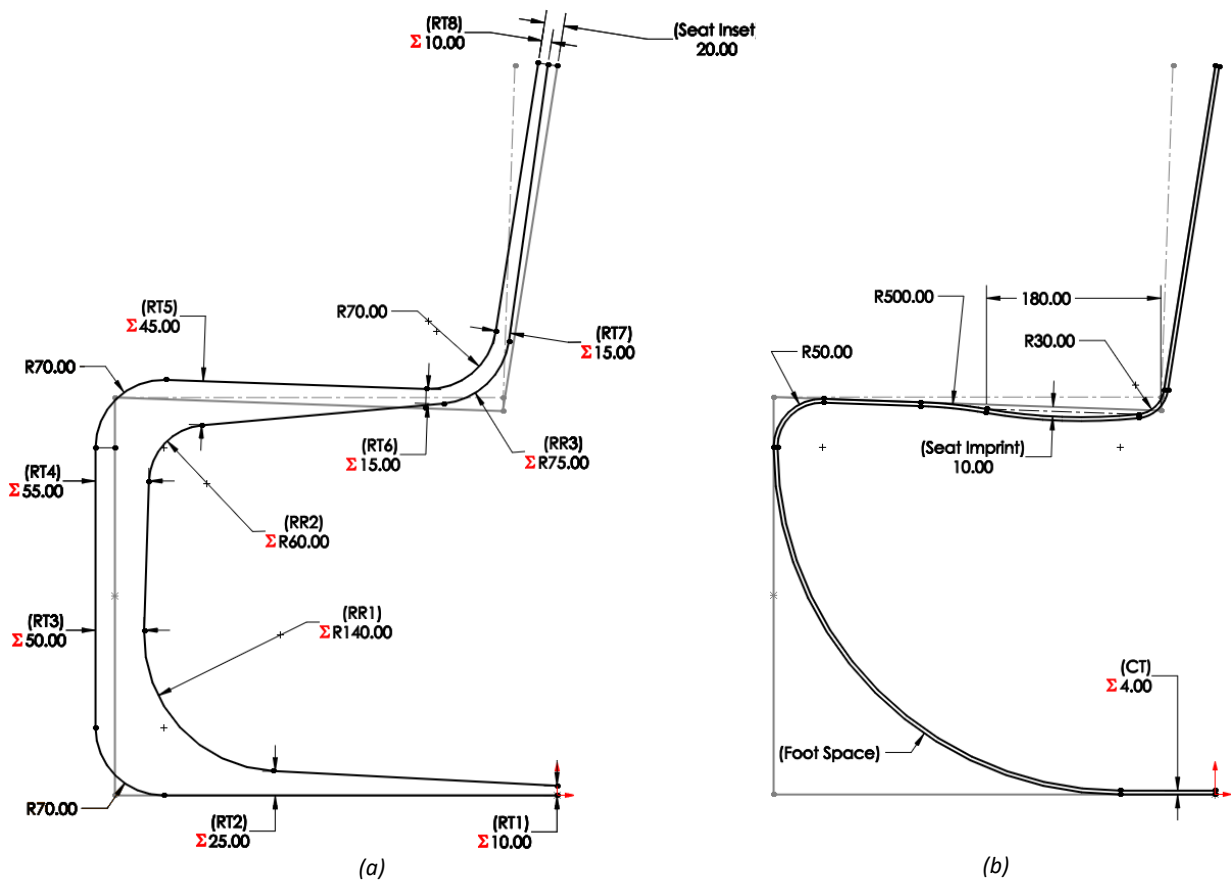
Images of the Final Plan (Rail) (a) and Final Plan (Center) (b) SOLIDWORKS sketches with the Preliminary Plan shown in gray.
